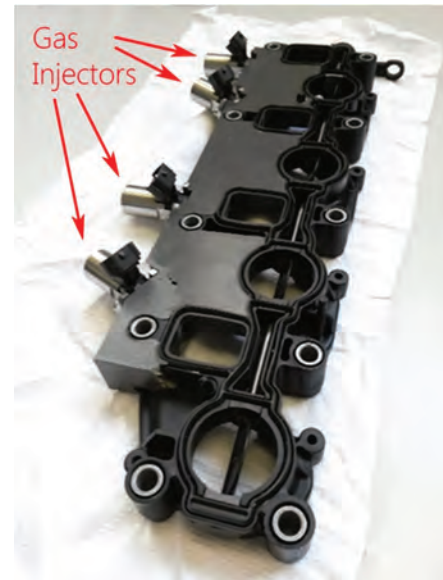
Four PFI gas injectors mounted on the swirl flap adapter of the original Diesel engine
